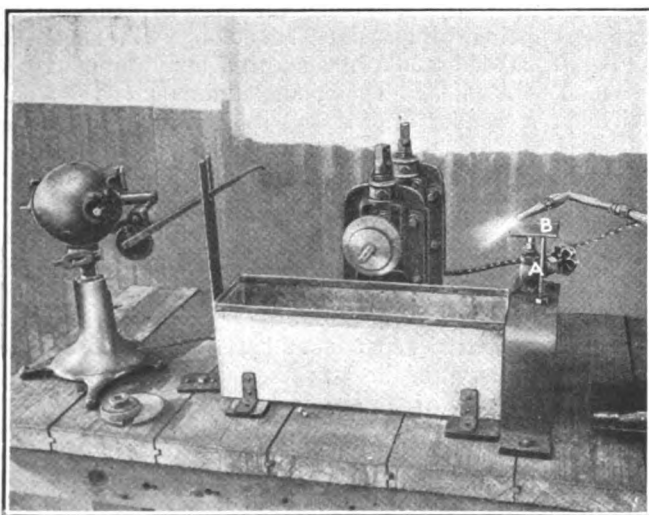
DEVICE FOR CARBONIZING ENDS OF TEETH IN RING GEAR
